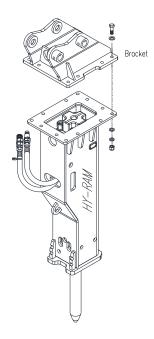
Housing Box, Mounting Bracket & Bolt Set
